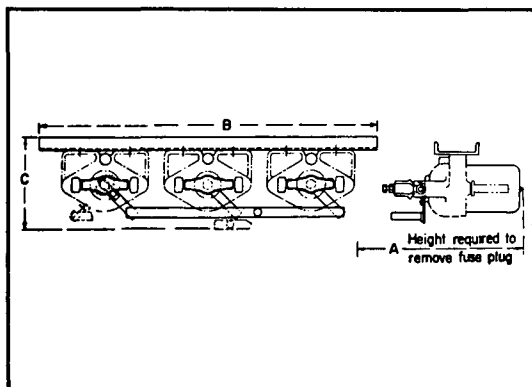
Long way mounted rack assembly for sealed oil cutouts
